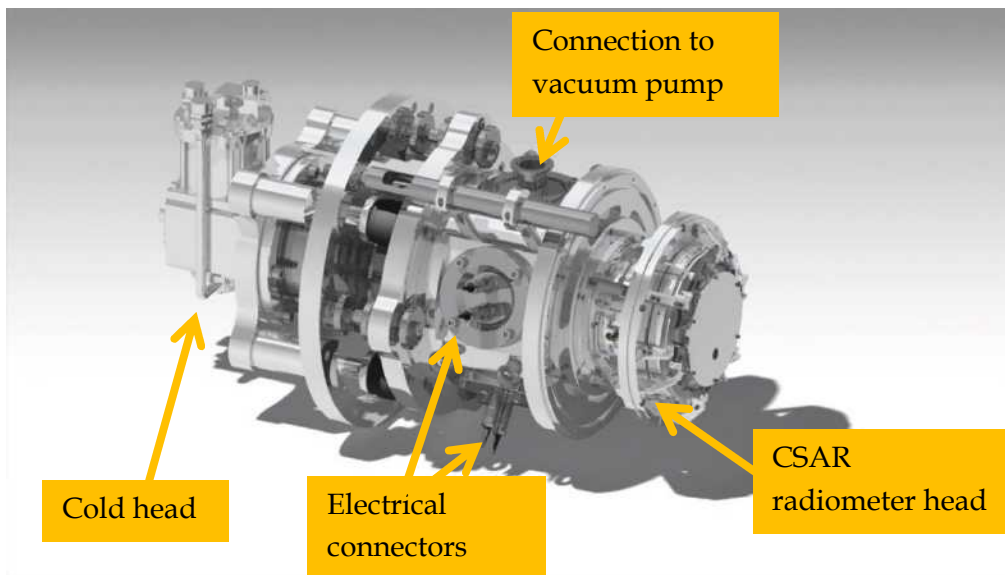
CSAR radiometer head mounted in vacuum chamber, 3D model
